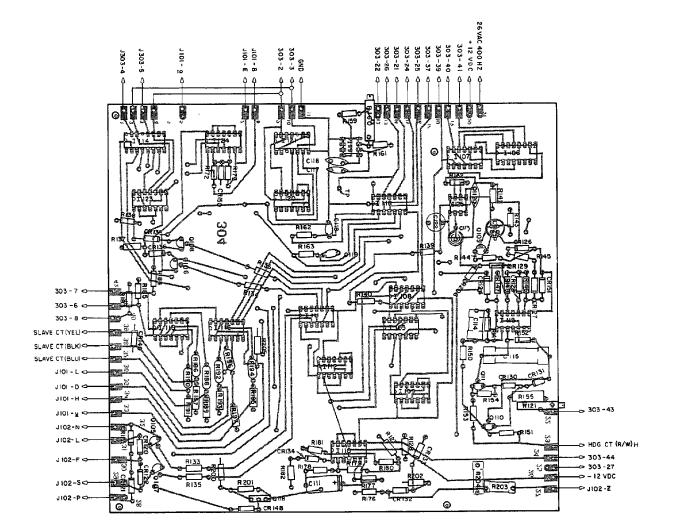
A P.C. BOARD ASSEMBLY, BOARD 304, DRAWING (Dwg. 300-05988-0000 Rev. 0)
